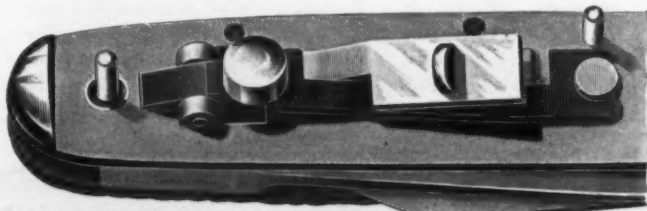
Mechanism of Safety Lock Press Button Knife.
